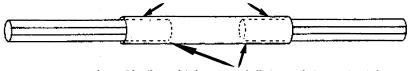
Insert both end tubes equal distance into center tube and mark on center tube where inner tubes end
